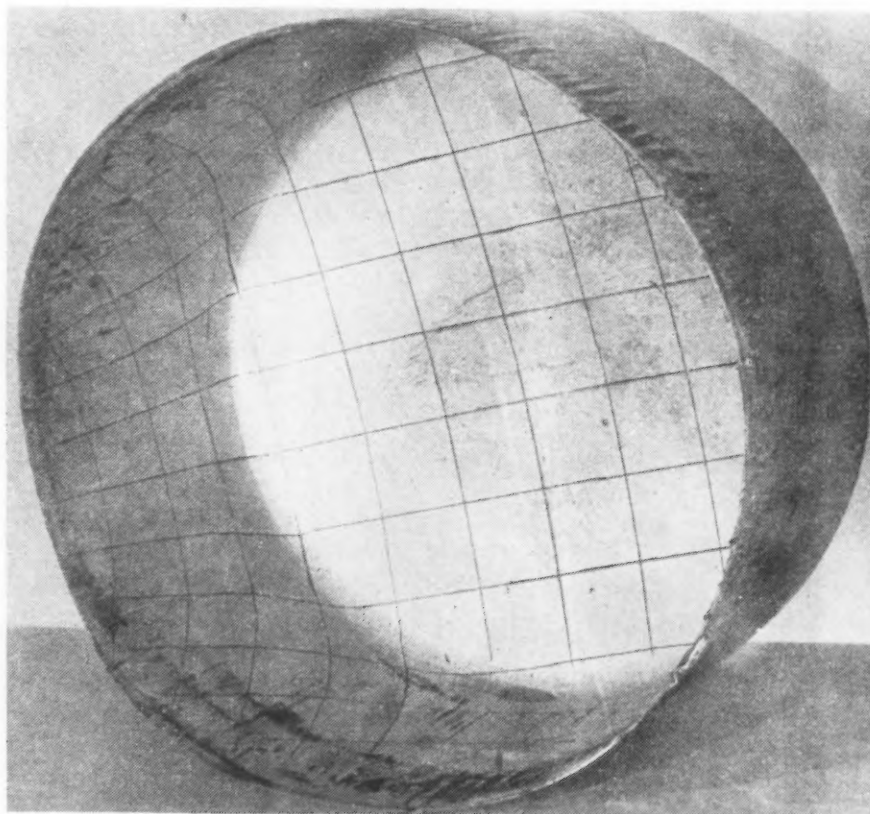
Flat silver plated steel sheet (0.05 in.) which was cross-sectioned and deep drawn. Courtesy American Electroplaters' Society.
